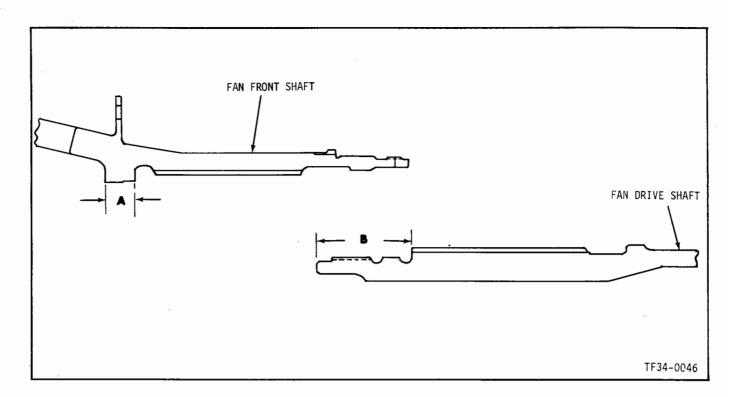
Fan Front Shaft Seating Dimensions - Before Installation
